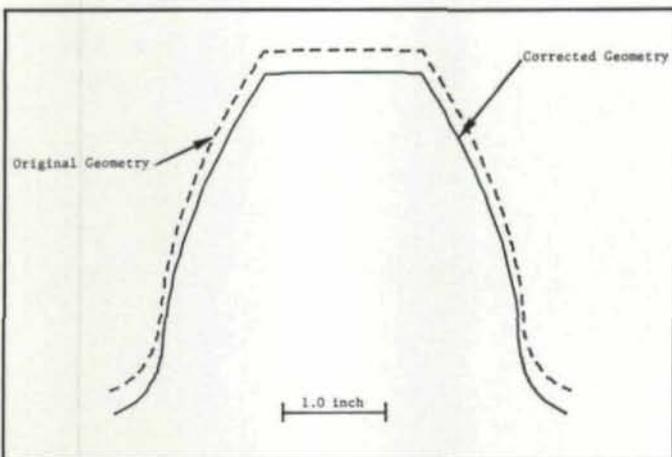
Computer Program Display of the Original Gear Tooth and the Corrected Gear Tooth Geometry
